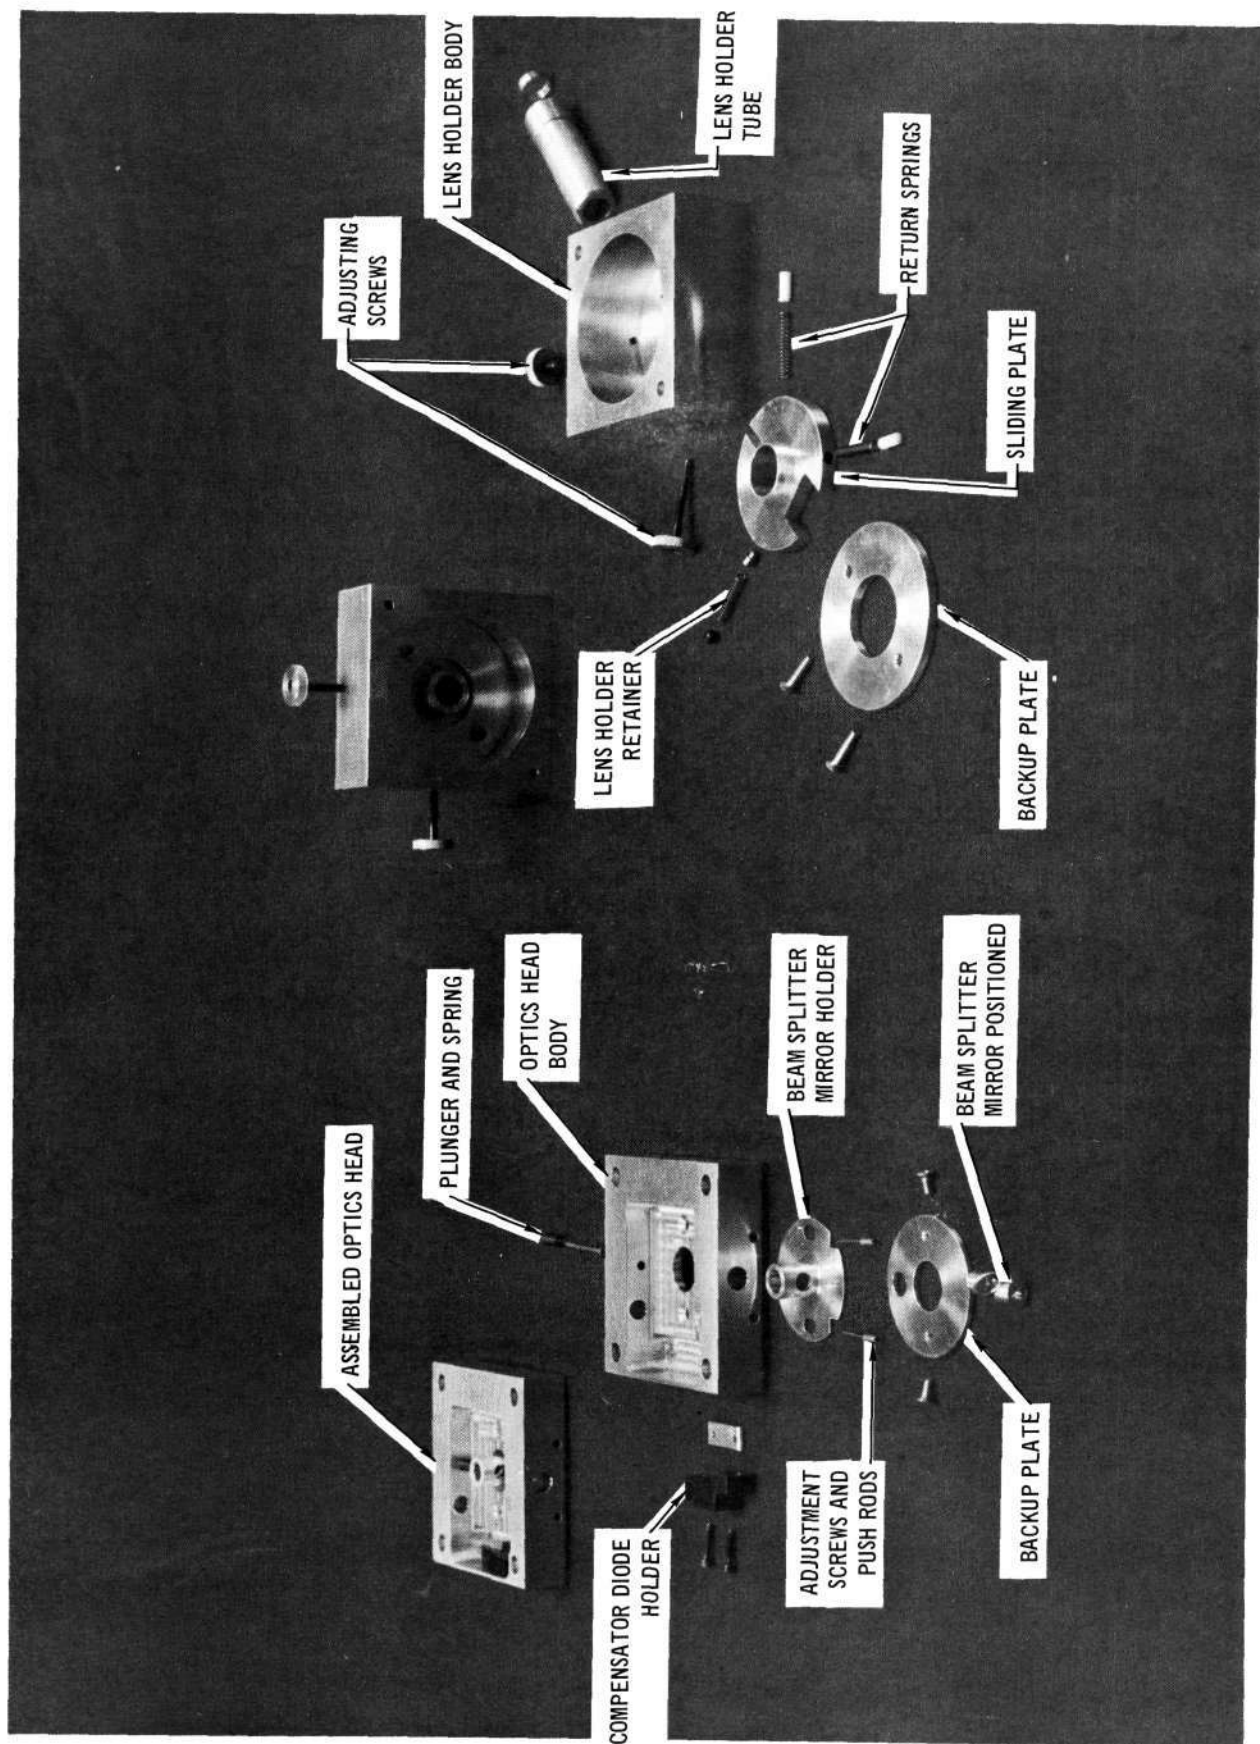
MODULATOR OPTICS HEAD AND LENS HOLDER
